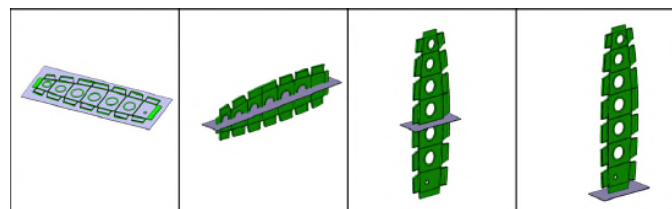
Examples of unidirectional (far right) and bi-directional build orientations along the three planes of symmetry for a wing rib. Based on [116]. Images courtesy of the Welding Engineering and Laser Processing Centre at Cranfield University.
